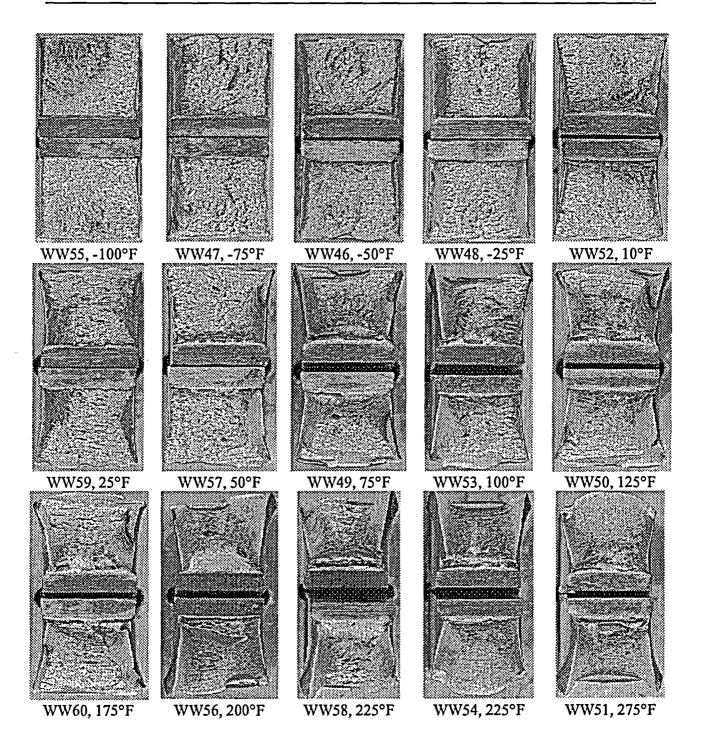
Charpy Impact Specimen Fracture Surfaces for Watts Bar Unit 1 Reactor Vessel Weld Metal
